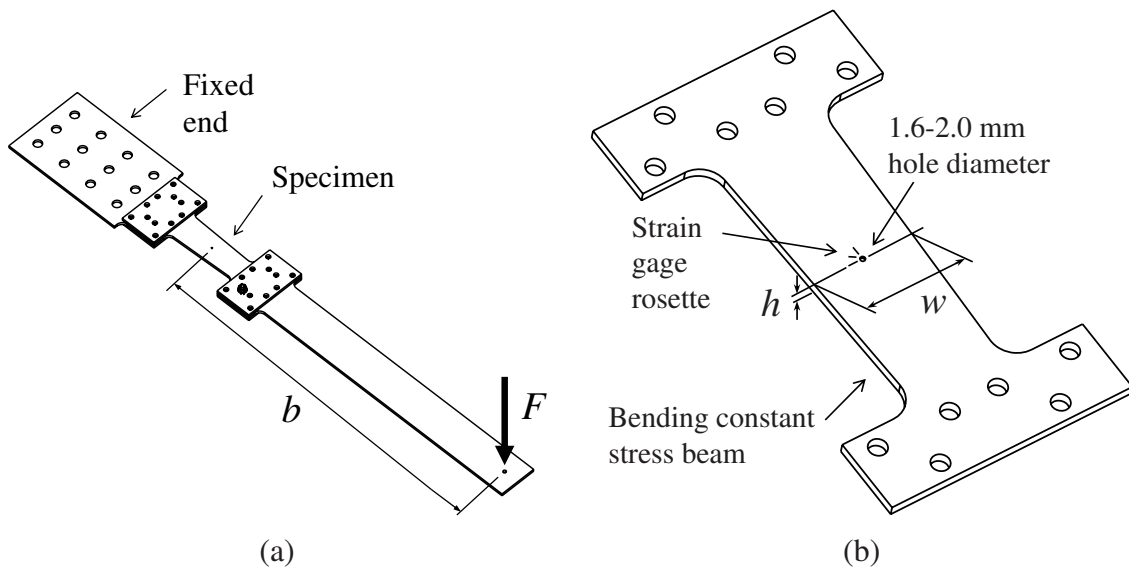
(a) Specimen under bending load. (b) Hole position on the specimen.
